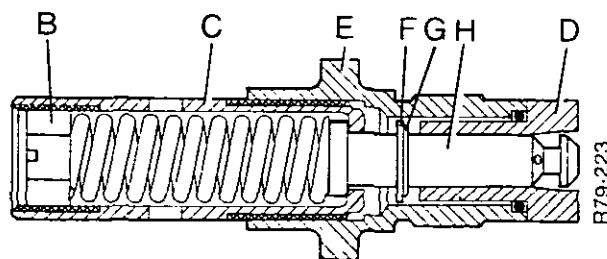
DISASSEMBLY OF THE FLOW VALVE
